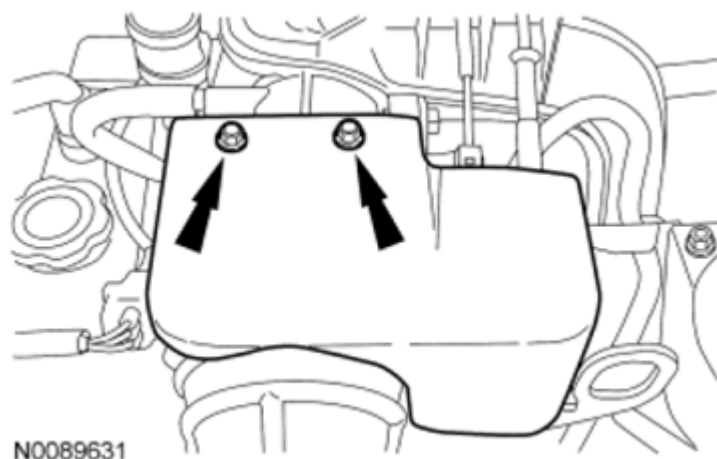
Locating Throttle Body (TB) Shield Bolts
